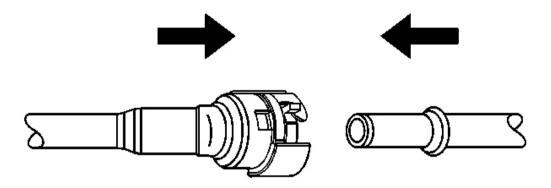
Connecting Fitting Of Retainer Courtesy of GENERAL MOTORS CORP.
